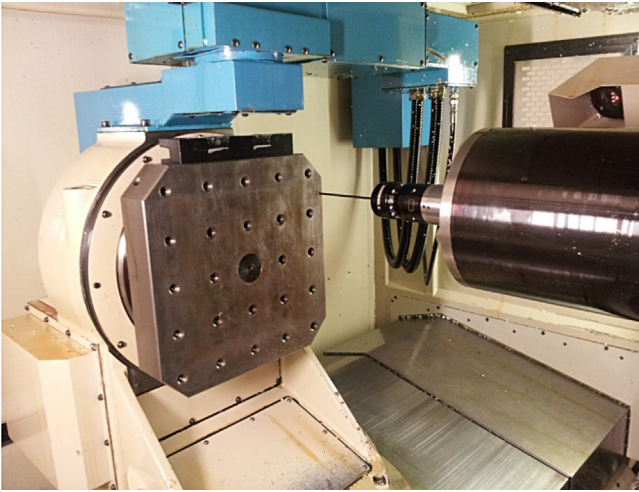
Machine table, of a WCBXFZYST five-axis machine tool, used as indigenous artefact for probing.
